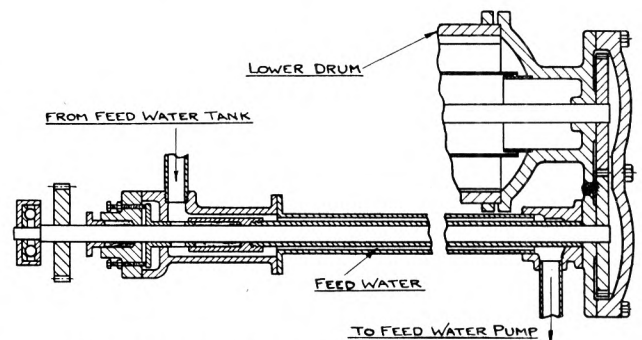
PROPOSED METHOD OF DRIVING THE IMPELLER
